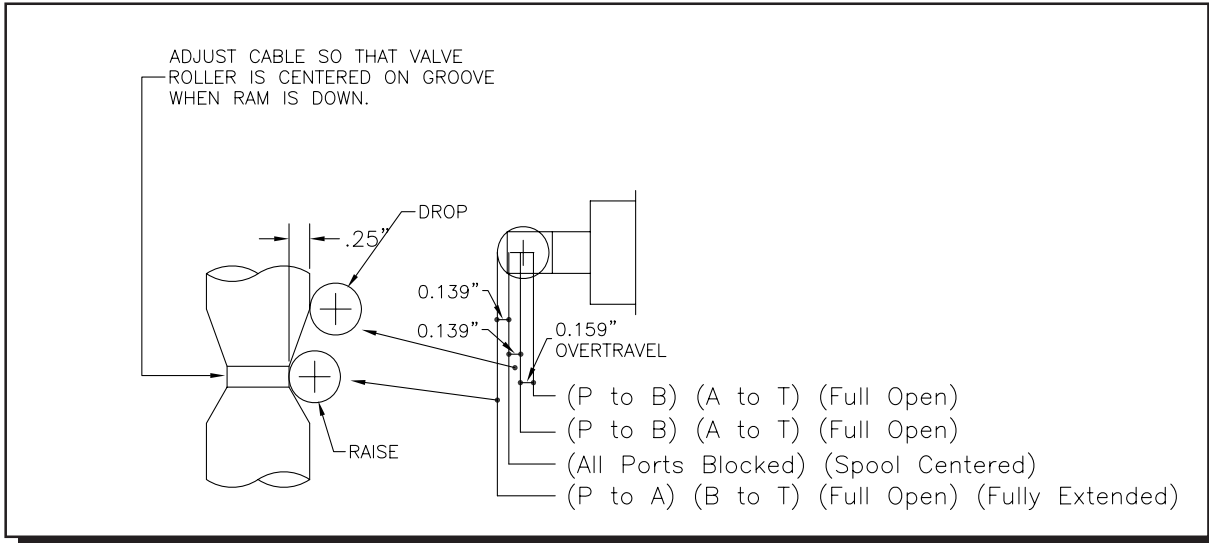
B. Adjusting the Stroke Control Cam / Valve
